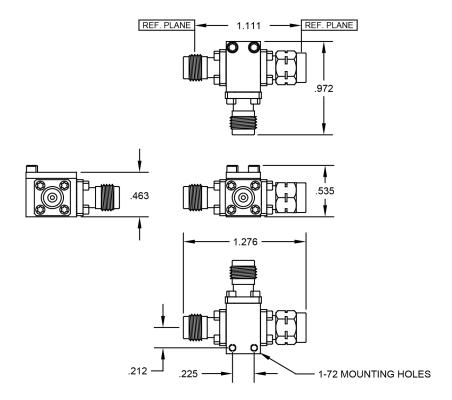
HL9467 mechnical drawing (opt. -JPJ)
